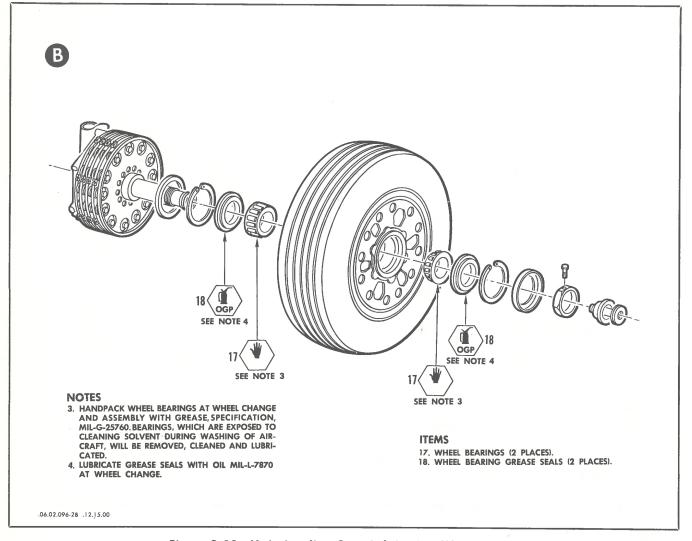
Main Landing Gear Lubrication (Sheet 2 of 2)
